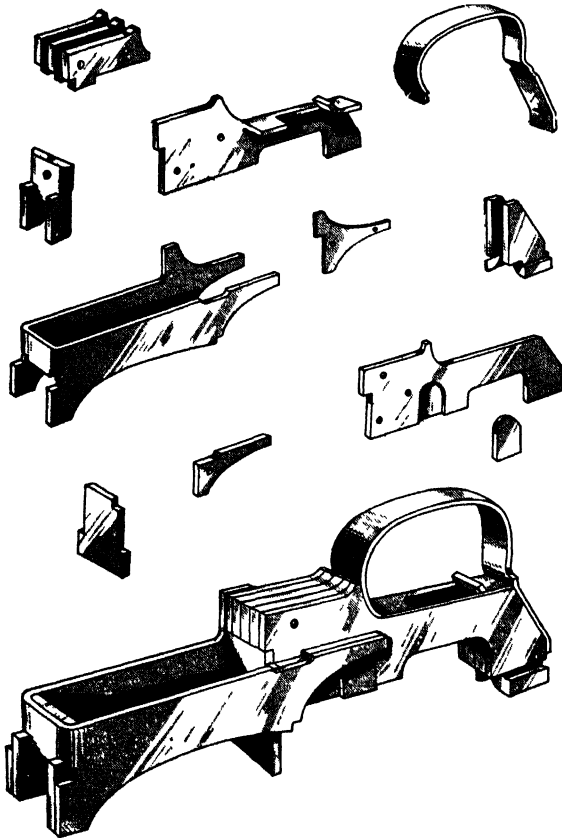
These parts of a carbine trigger guard, formerly made from forgings or castings requiring much machining, are now produced as stampings and joined by welding and brazing.
